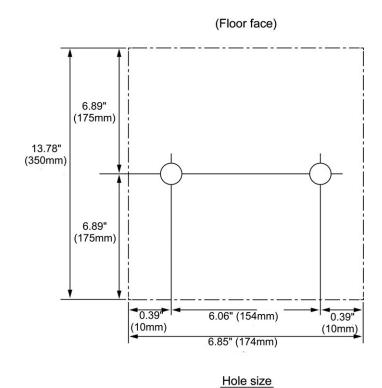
Stand Mount Spacing Guide (CHS1U-US+CHS2U-USx1 Chassis Installation)
